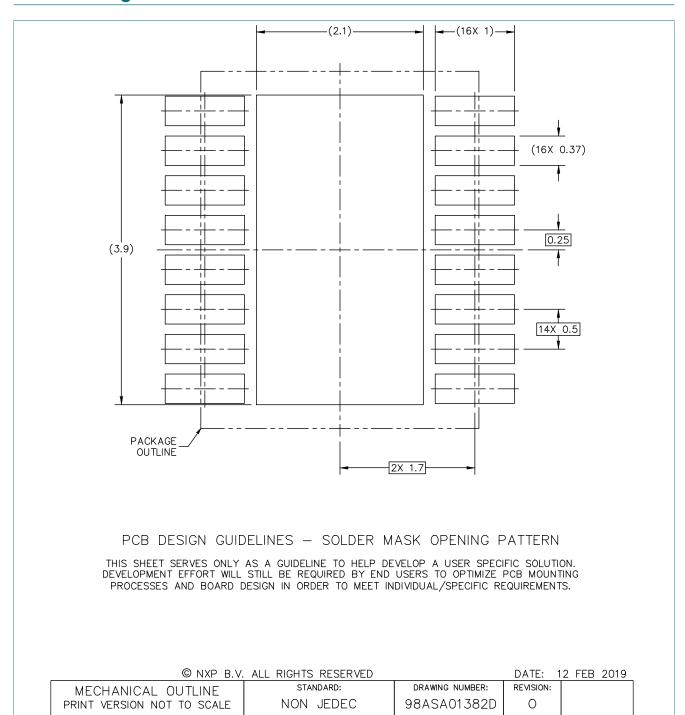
Reflow soldering footprint part1 for HLSON16 (SOT1992-1(DD))
